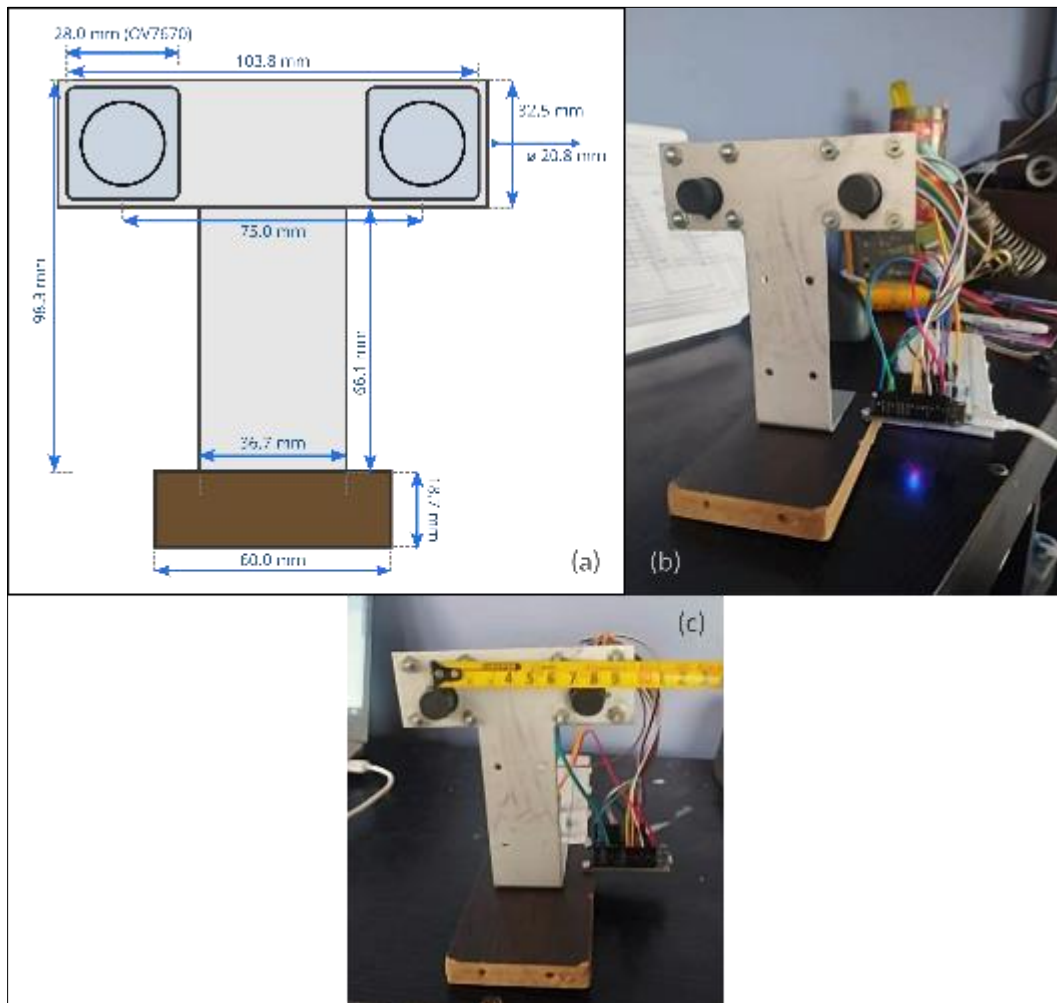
Stereo head and prototype assembly. (a) Front view with key dimensions and the fixed baseline $B = 75\text{ mm}$. (b) Oblique view of the mounted head. (c) Baseline verification by tape measure. OV7670 modules (28 mm PCBs) are mounted on a rigid T-plate; ESP-WROOM-32 boards are placed near the sensors to shorten DVP runs
